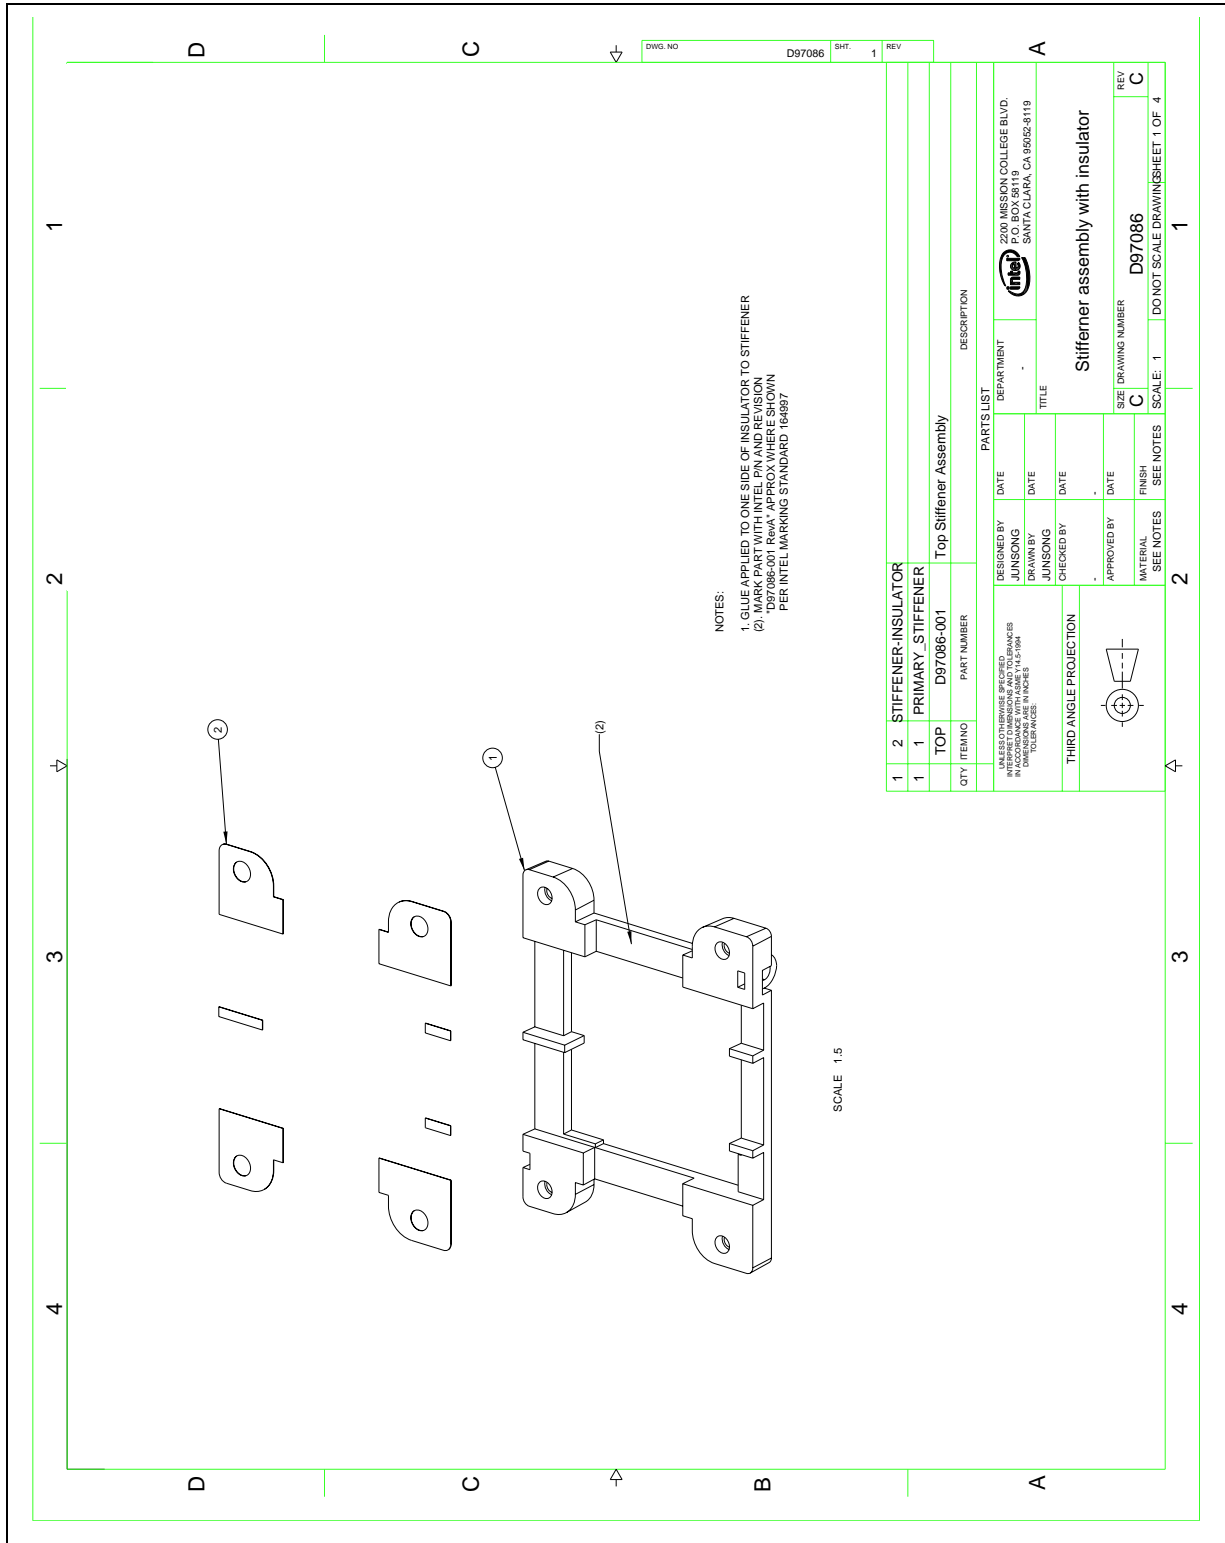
CNB Heatsink Stiffener Drawing (2 of 4)
